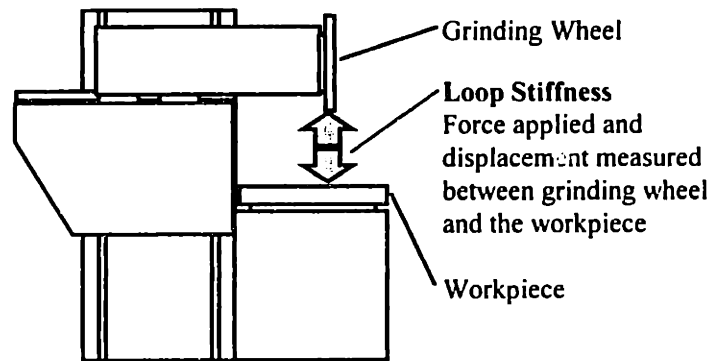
Diagram of the configuration for measuring loop stiffness in a surface grinding machine.
